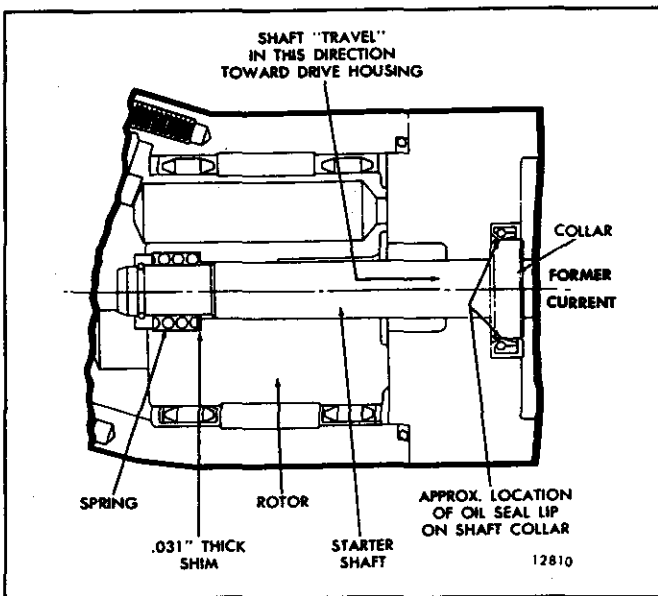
Location of Starter Shaft Compression Spring Shim (Series "20" Motor)
